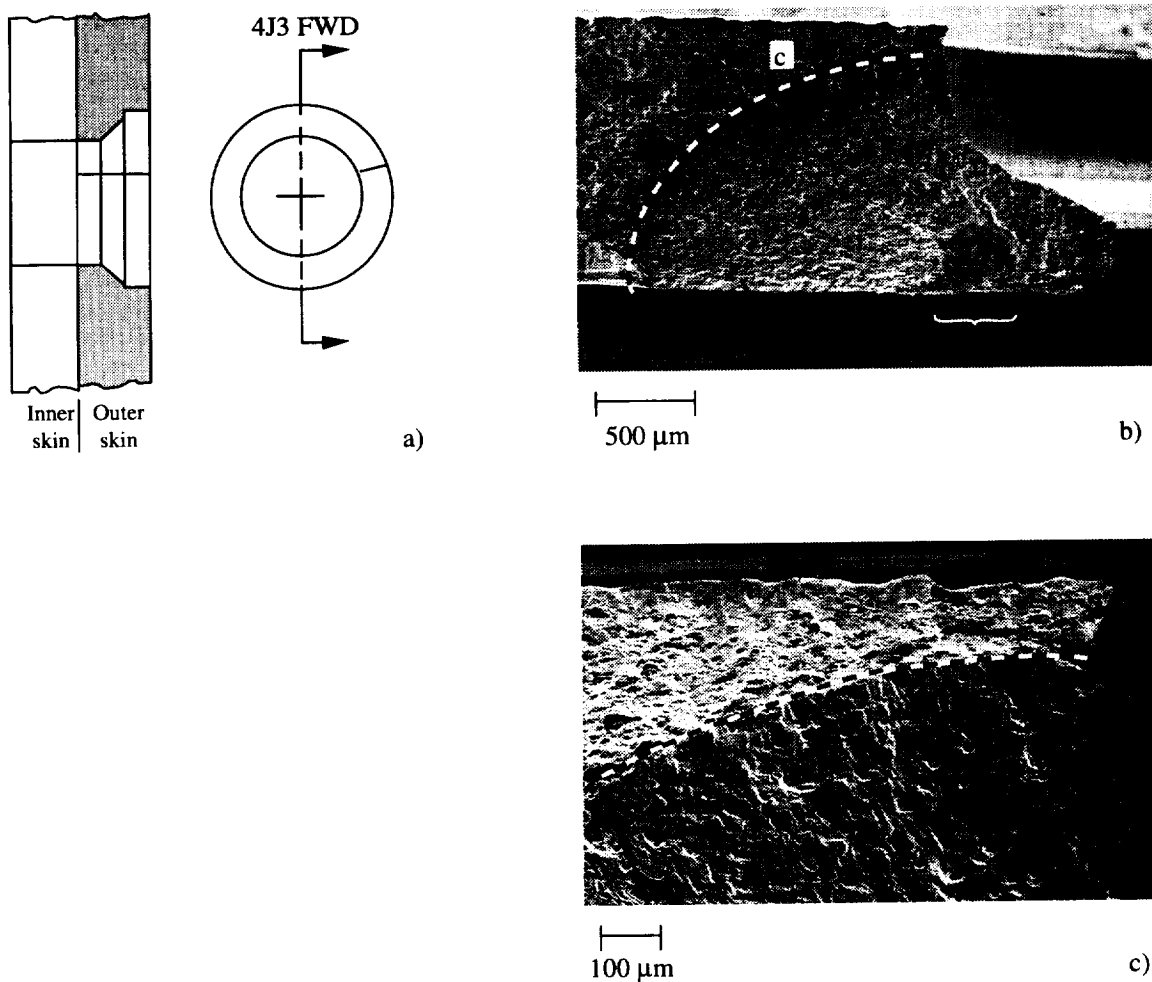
a) The schematic shows the rivet hole 4J3 configuration and the location of the outer skin fatigue crack oriented in the forward direction and about the 2 o'clock position. b) The SEM micrograph shows the fatigue crack fracture surface located at the outer skin rivet hole (right). The dashed line marks the fatigue crack front and the bracket marks the region of crack initiation. c) The SEM micrograph shows the fatigue crack front and the ligament, region "c", in Figure 11.13.b. The dashed line marks the fatigue crack front where it intersects the rivet hole (right). The outboard surface of the outer skin is located at the top of the micrograph.
